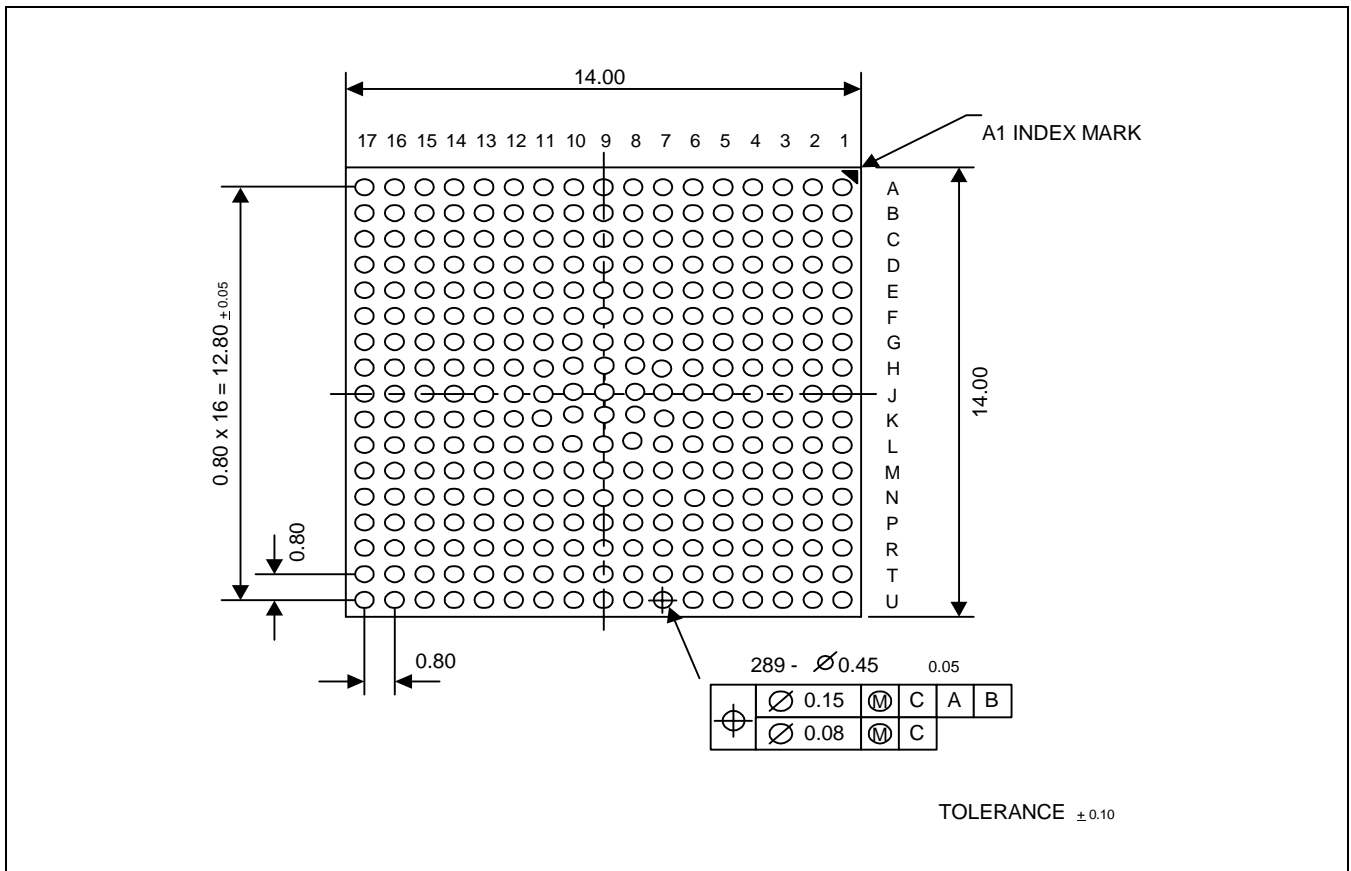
289-FBGA-1414 Package Dimension 2 (Bottom View)
